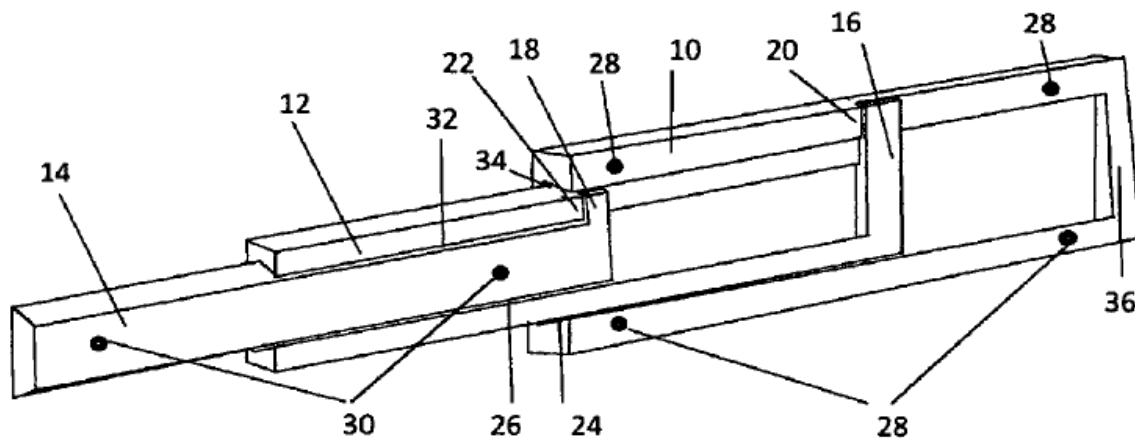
of Haxton depicts “[a] perspective view of the drawer slide” showing frame part 10 that has unitary stop part 36 at the back part. *Id.* ¶¶ 19, 29.
